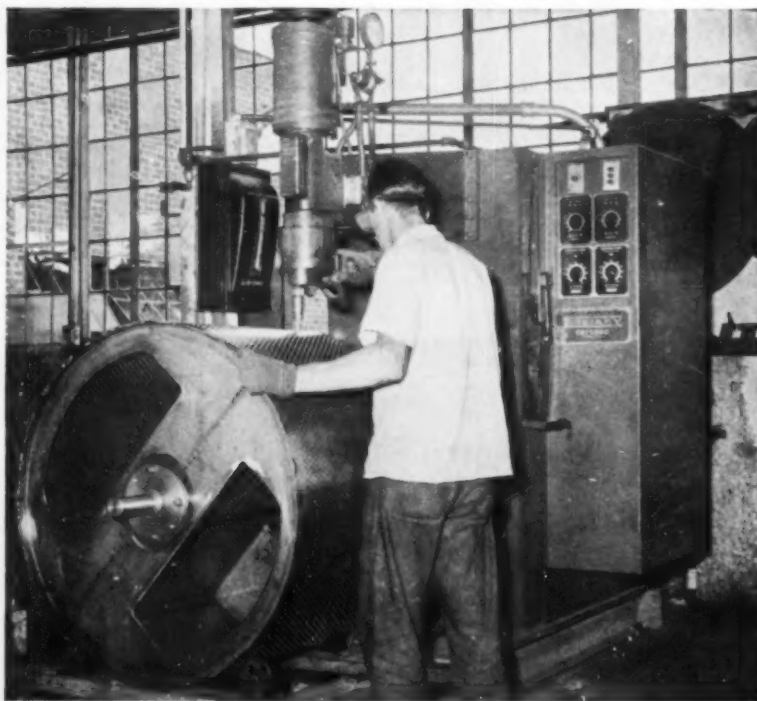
Joining 12 gauge cold rolled, perforated steel cylinder wrapper to housing. Welding is accomplished at flanged edge of head. The wrapper is formed in two semi-circles. The ends of the semi-circles butt against projecting edge of two partitions. This joint is fused with an arc welding torch.
